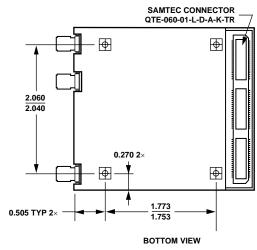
Outline Dimensions Dimensions shown in inches Tolerances:  $0.xxx = \pm 5$  mils
